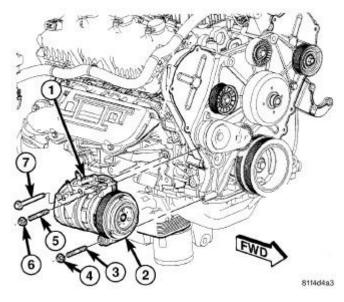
Accessory Drive Bracket & Fasteners Courtesy of CHRYSLER LLC
